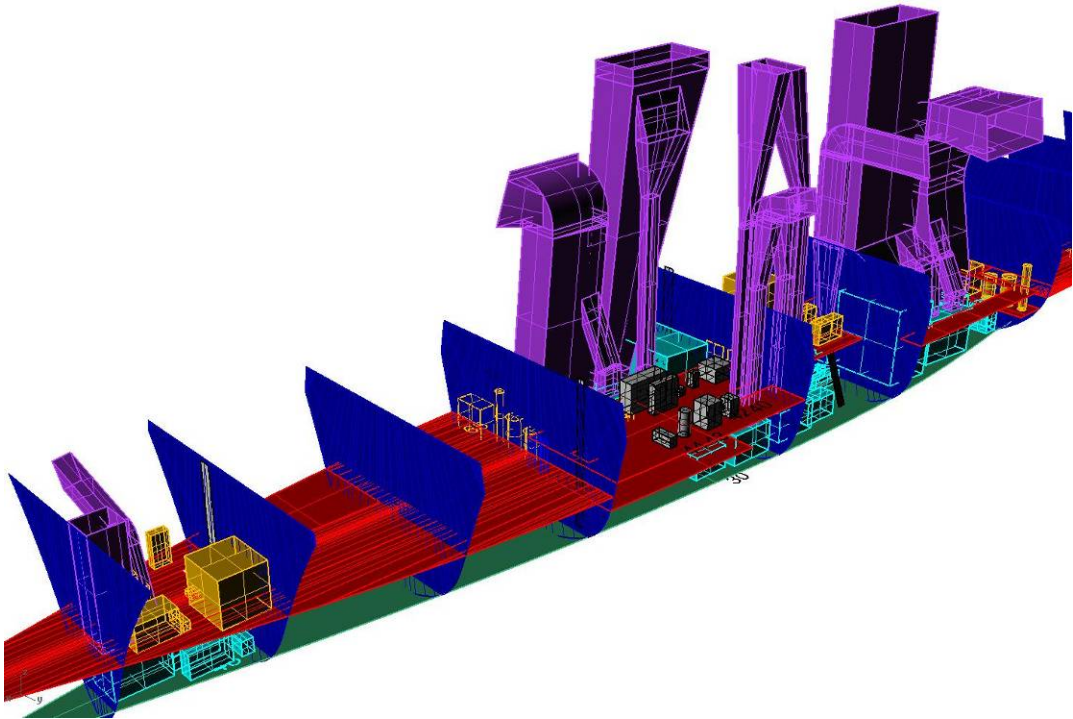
Machinery Space Arrangements with Intakes and Uptakes
